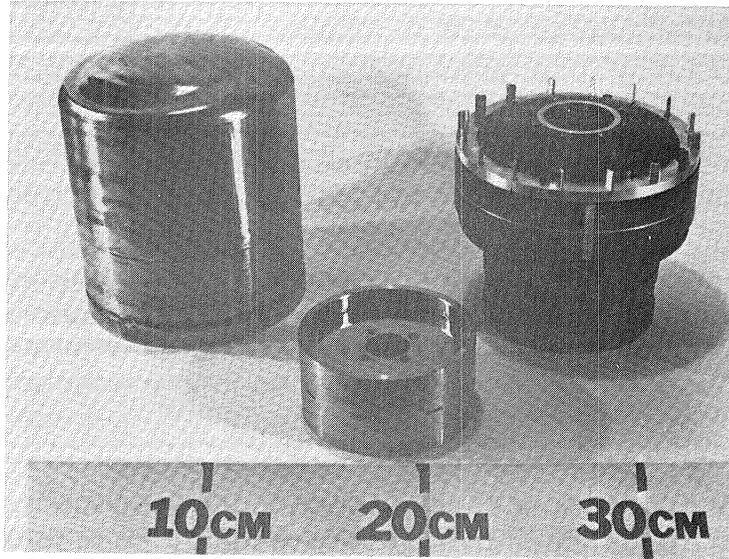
Spin-bearing displacer components on 1 kW Stirling engine.
